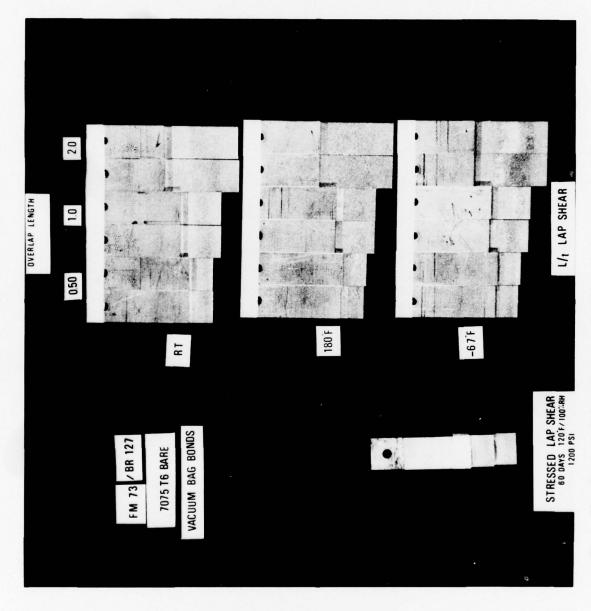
Specimen Failure Surfaces—FM 73, Optimized FPL Etch, Vacuum Bag Bonds
